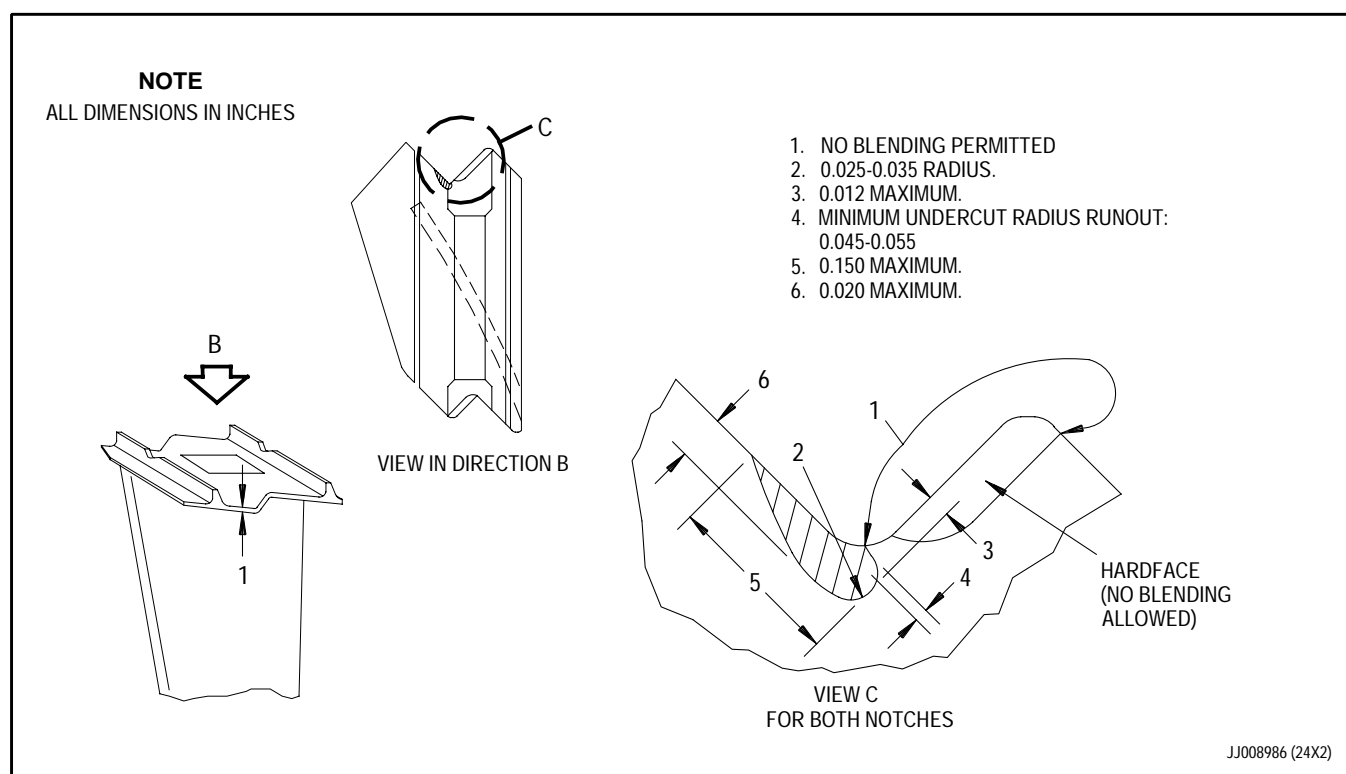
Fourth Stage Turbine Rotor Blades - Shroud Notch Blending
